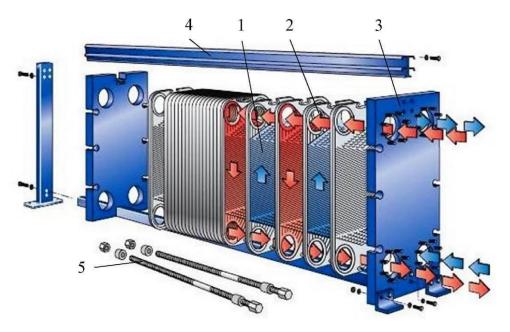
Design schemes of the plate heat exchanger:1 – working plates; 2 – rubber gaskets;
